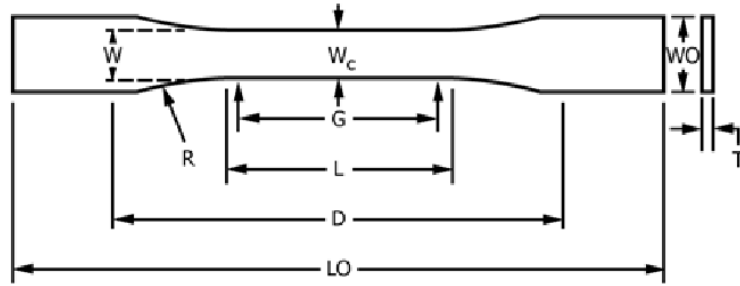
Drawing of the test specimen per ASTM D638-14 [151].
